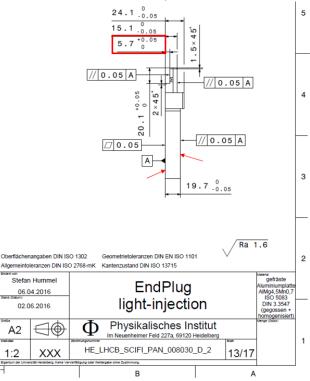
example of a manufacturing drawing of the EndPlug light injection
